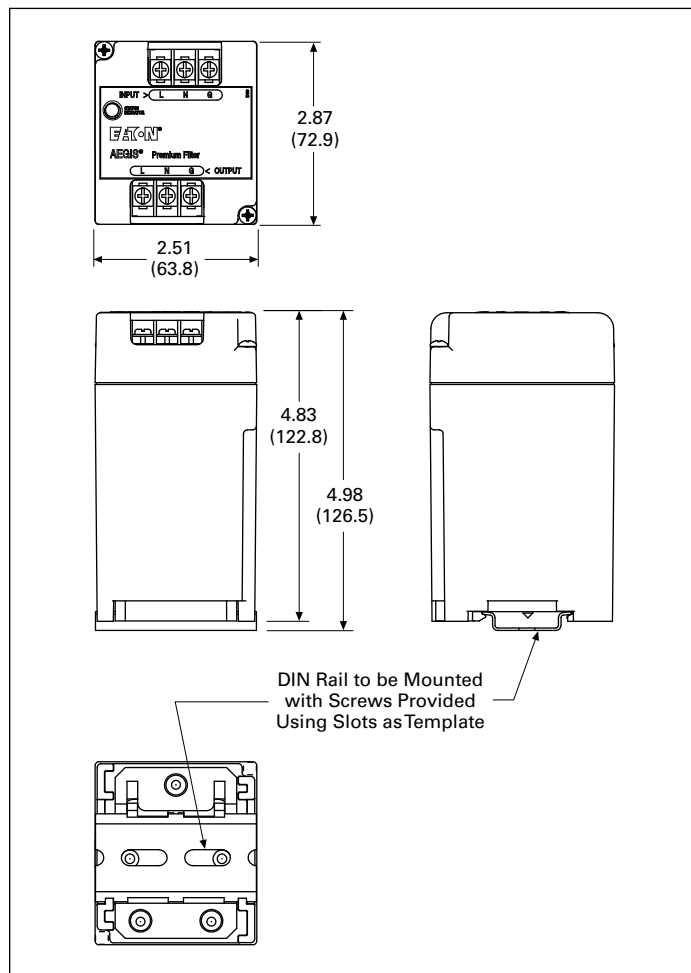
AGPVxxxxx Dimensions in Inches (mm)
